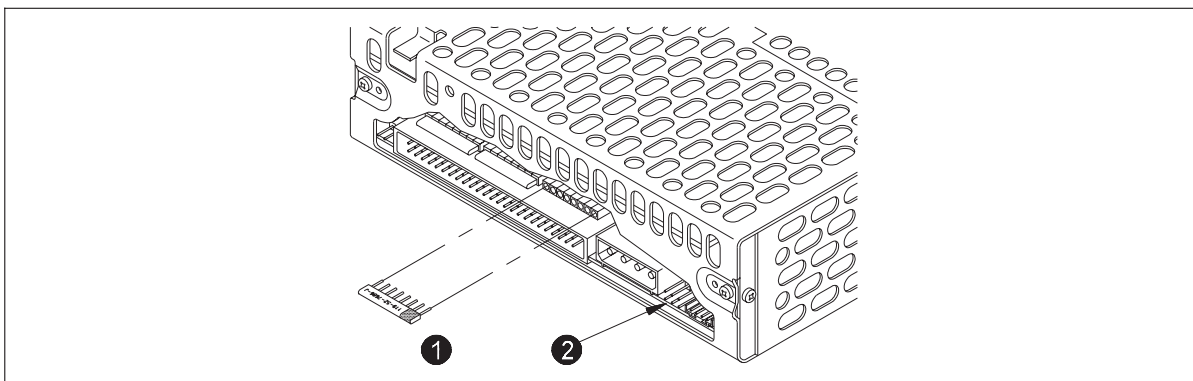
Removing the terminators and SCSI ID jumpers (Note: The position of the terminators and SCSI ID jumpers may differ on your tape drive.)
